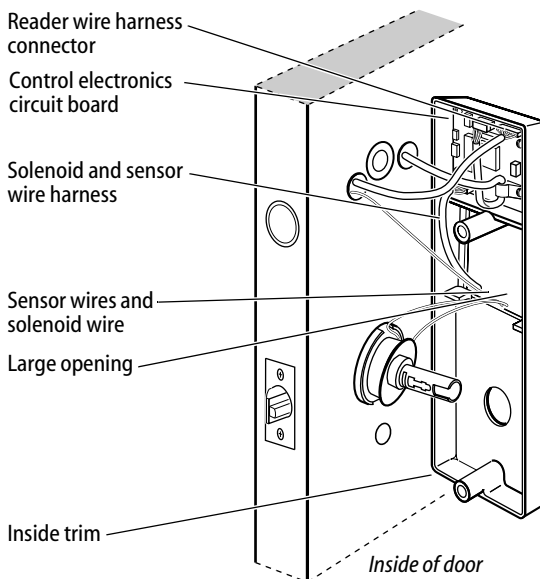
Connecting the reader wire harness to the control electronics circuit board
